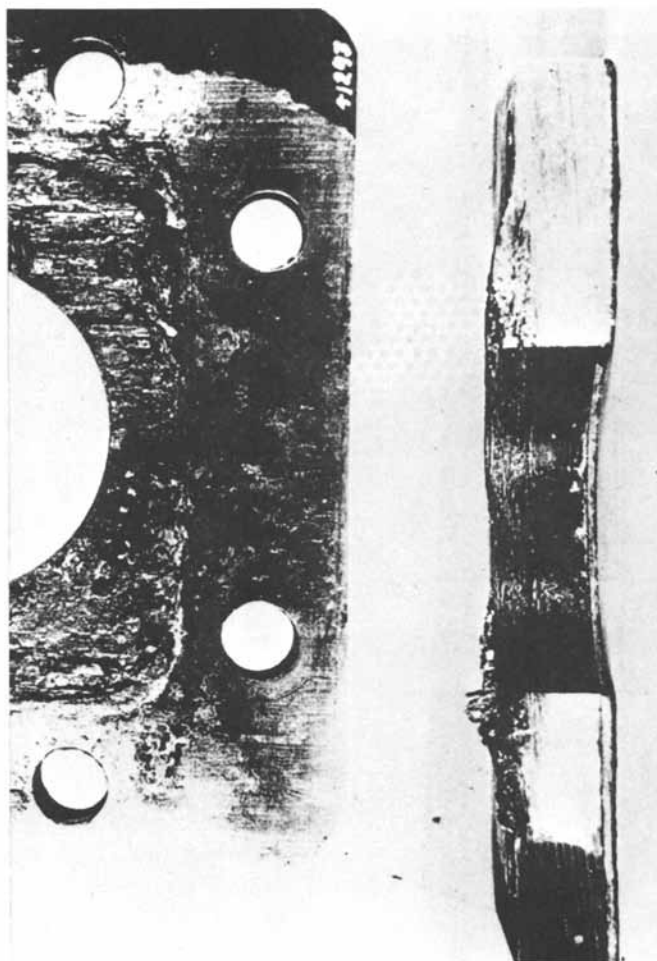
Wrought-aluminum header plate failed by exfoliation corrosion and cracking
